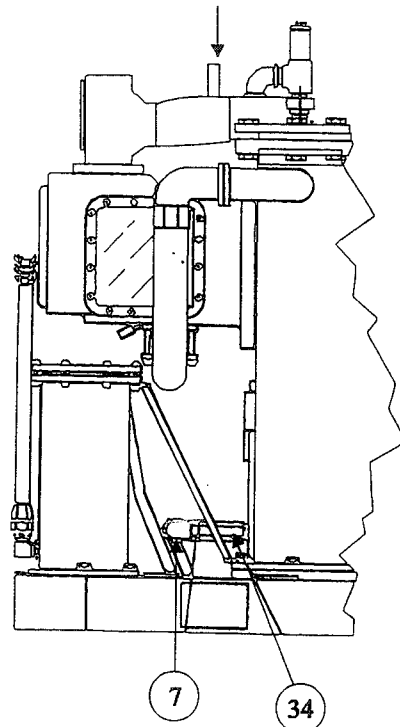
Main Piping Assembly (sheet 1 of 3)
